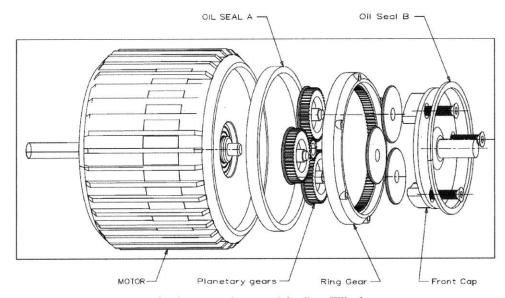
, planetary gear speed reduction mechanism of the GreenWheel
